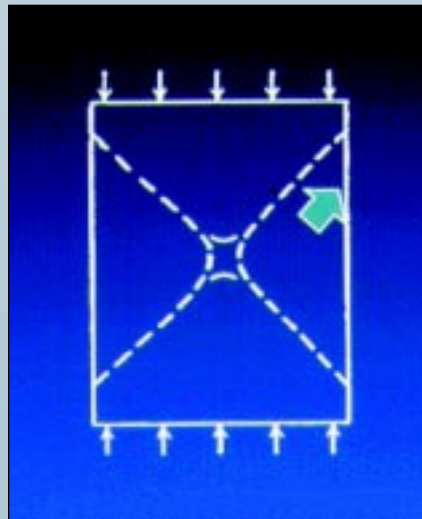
This drawing depicts the typical shear or "cone" type failure of a standard cylindrical molding sand specimen under a compressive load.
